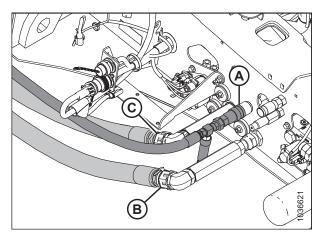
Header Drive Hydraulics – Hard-Plumbed Fittings
